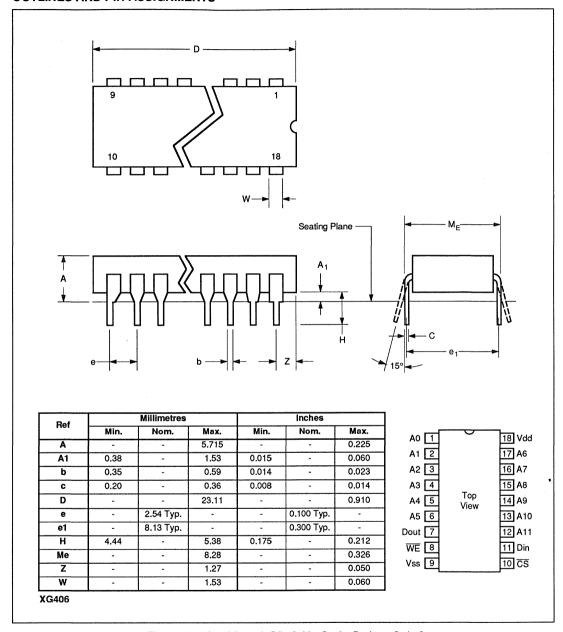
18-Lead Ceramic DIL (Solder Seal) - Package Style C
